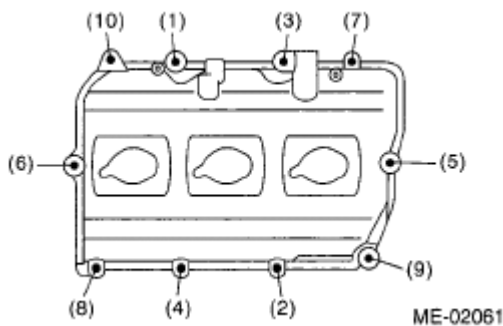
Tightening Sequence Of Rocker Cover Bolts For LH Side
